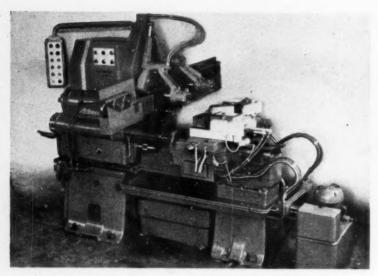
Maxnovo Automax-22 hydraulic multitool lathe equipped with a Facomax work handling unit
